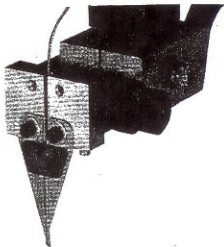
Close-up of the Model HE50RF Thermode Holder with a Model 17BM070 Blade Thermode.
